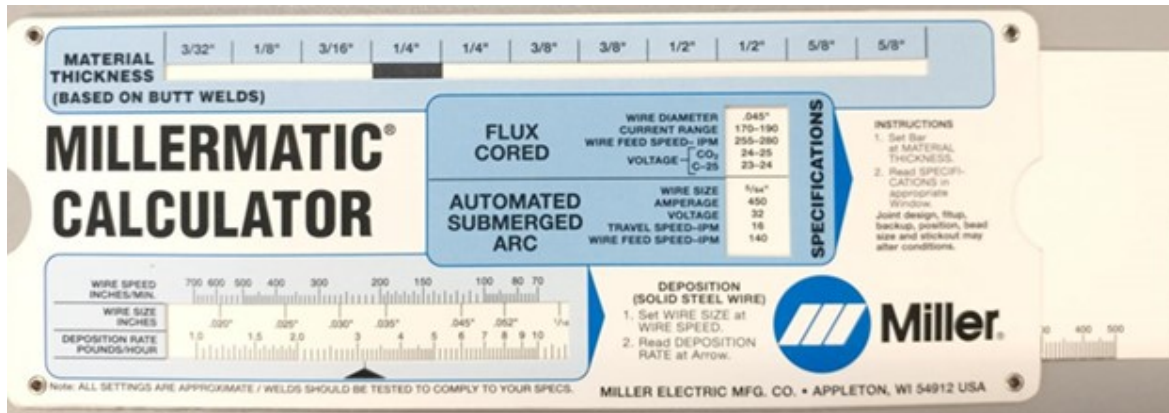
Millermatic Calculator, Miller Electric™ [35]
